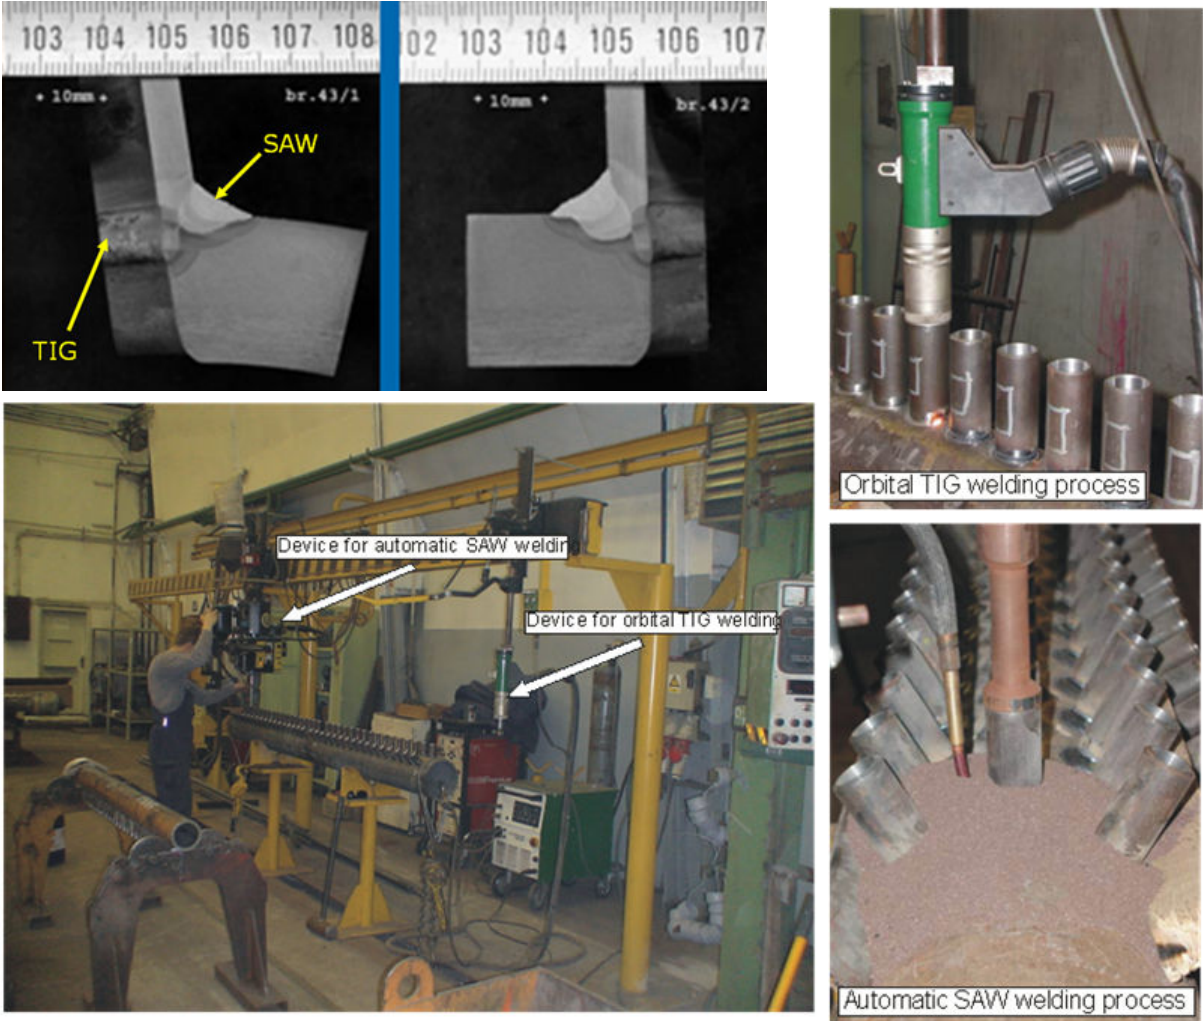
Application of TIG (for root pass) and SAW (for fill passes) at welding pipe connection to pipe chamber joint
